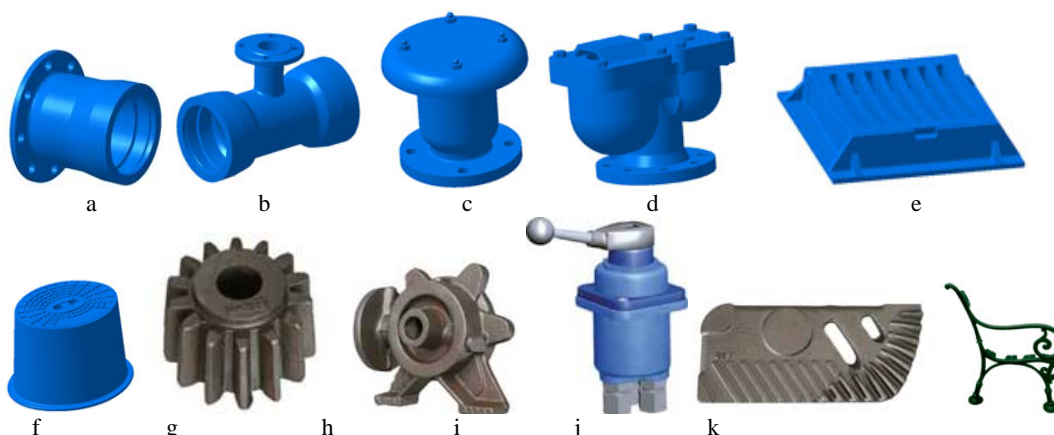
a. EU flanged and tyton socket pieces, b. MMA flange on tyton tee, c. VV air valve - single body, d. DVV automatic air valve with two balls, e. sewage greed and frame, f. pit hydrant cover - with elliptic opening, g. sprocket h. bearing case, i. direct brake, j. segment for steam boiler, k. bench side
